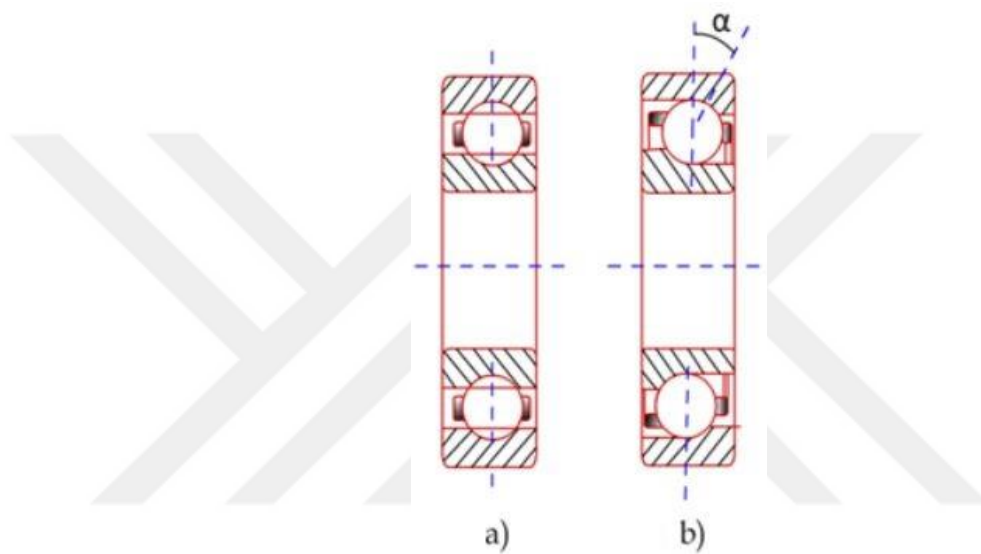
Radial bearings a) deep groove b) angular contact (NPTEL, 2019)
